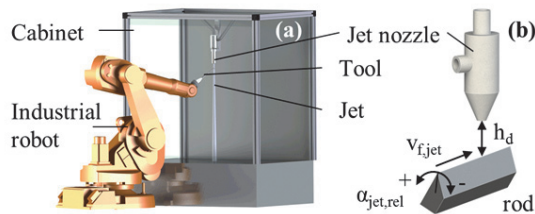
(a) Wet abrasive jet machining with industrial robot; (b) cutting edge handling parameters for the robot guidance.
